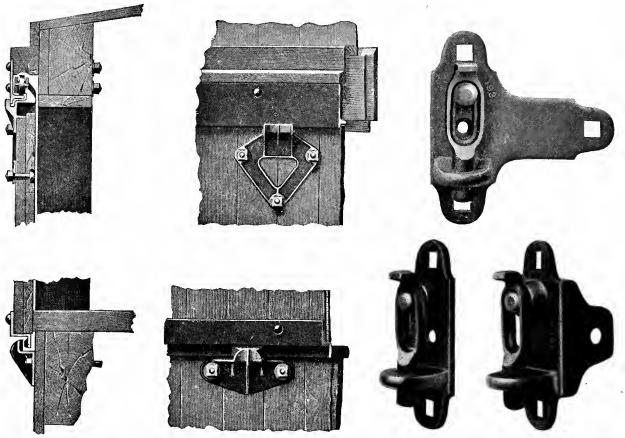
Detroit Door Fixtures. Hutchins Car Roofing Company.
